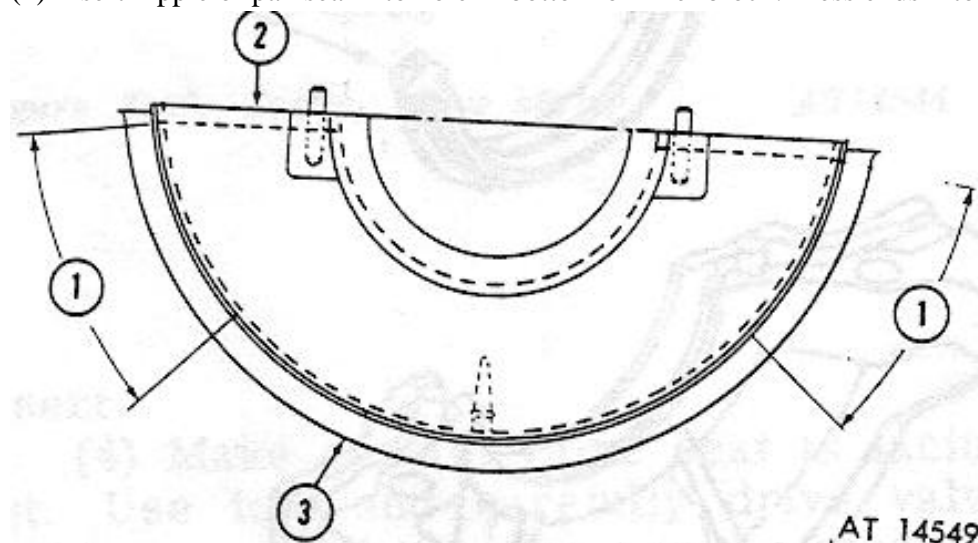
Crankshaft rear Oil seal - exploded view.
